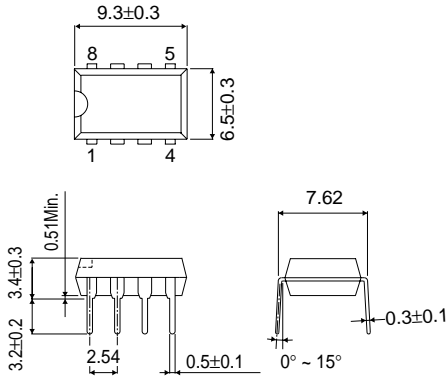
(a) PHYSICAL DIMENSION (Units : mm)
